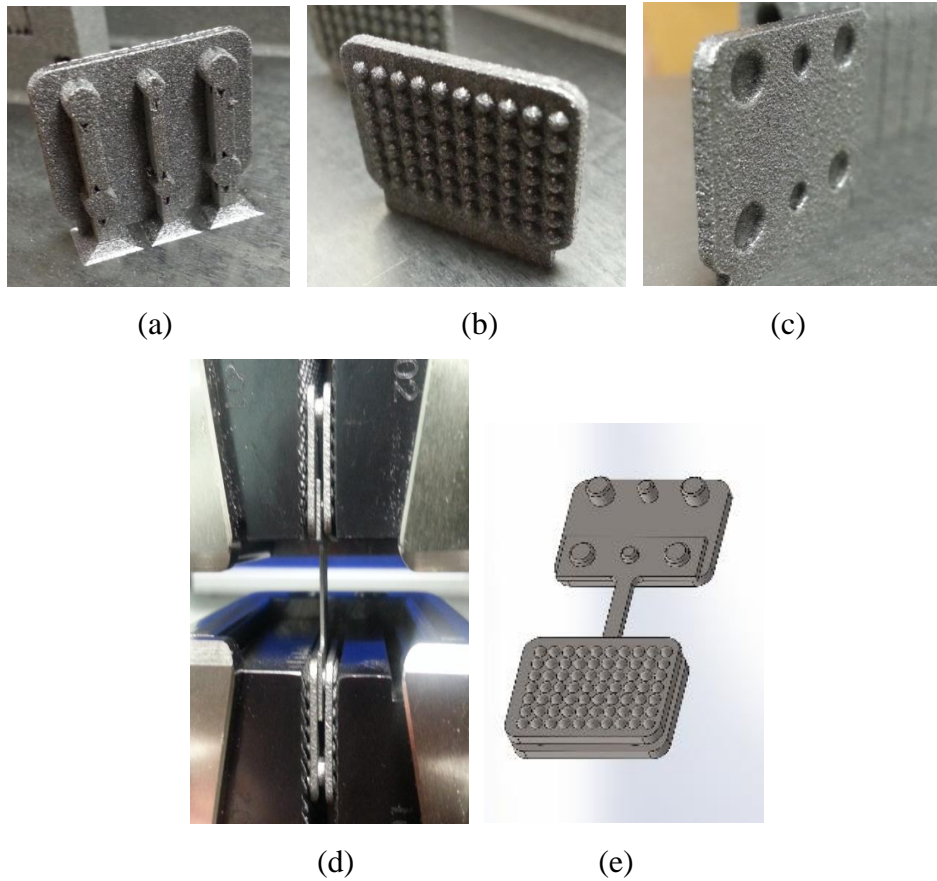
Insert with pins (a); grip surface (b); insert with cavity (c); mini-specimen setup with inserts and wedge grips tightened (d); and computer model of specimen and inserts (e).
